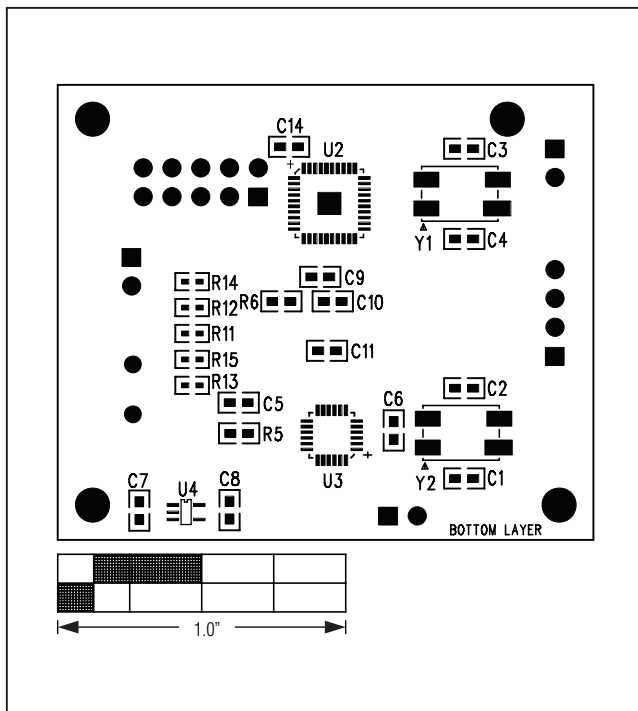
MAXADClite+ Component Placement Guide—Solder Side
